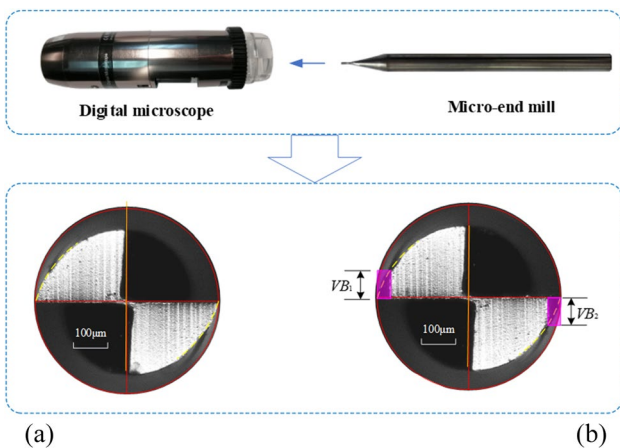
Image of tool flank wear in the micro-end milling. (a) A fresh tool; (b) After the 10th cutting
